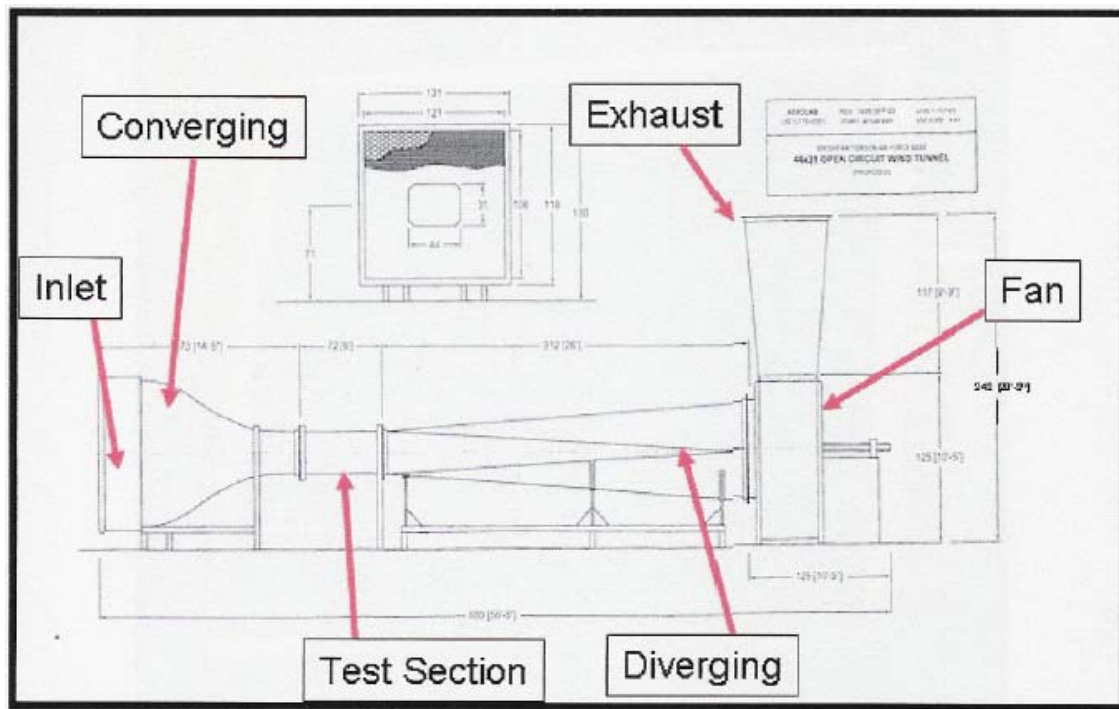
Wind Tunnel Sketch (Parga, 2004: 62)
